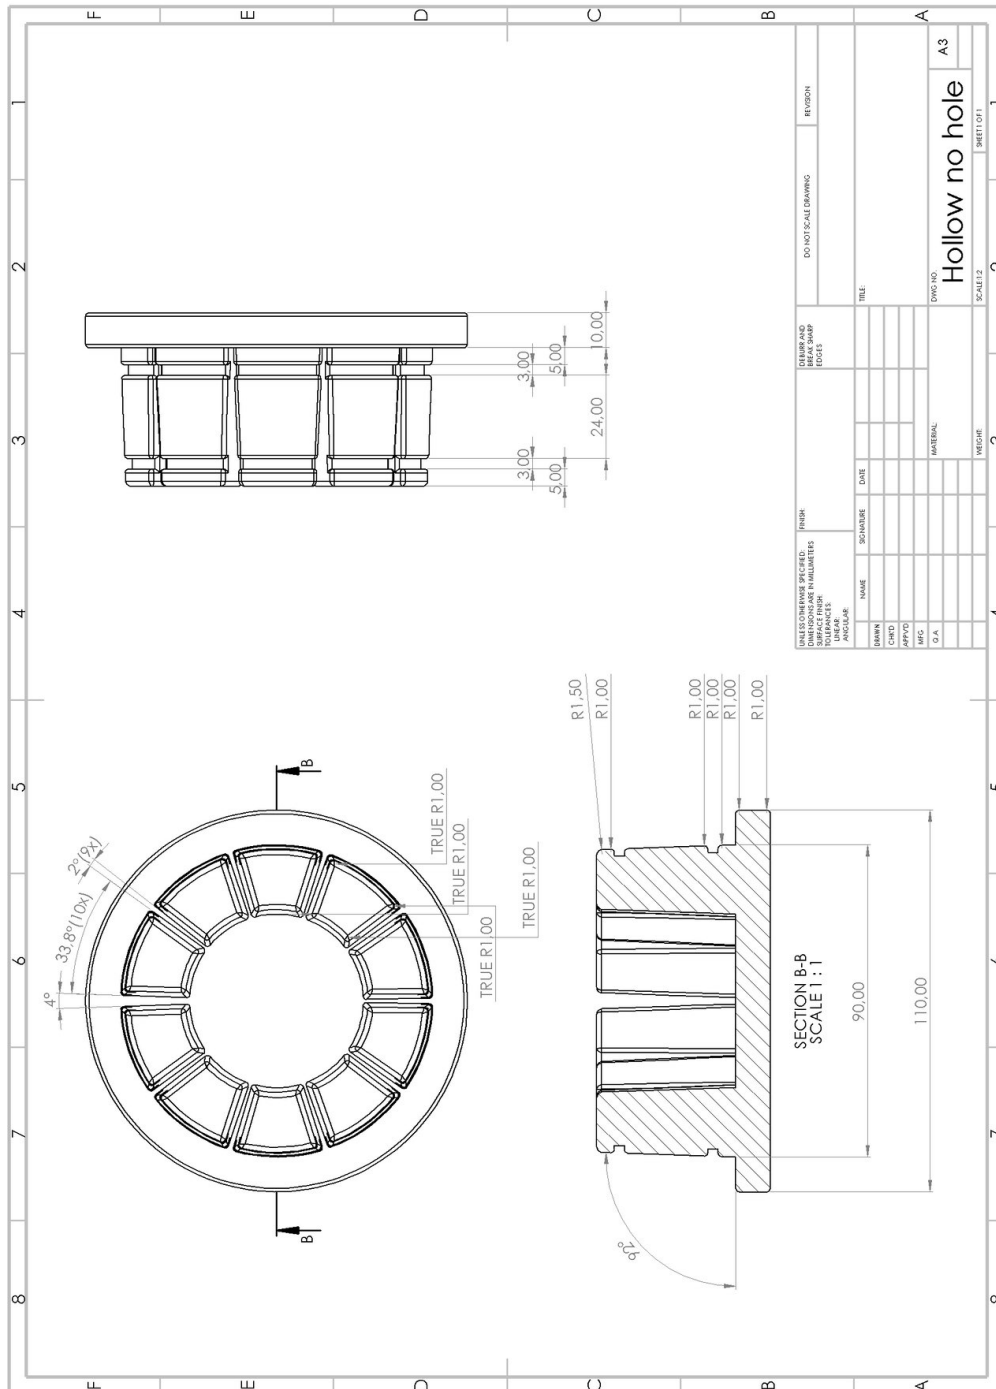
Solidworks drawing of the closing disk for the hollow cylinder, with no air supply hole
